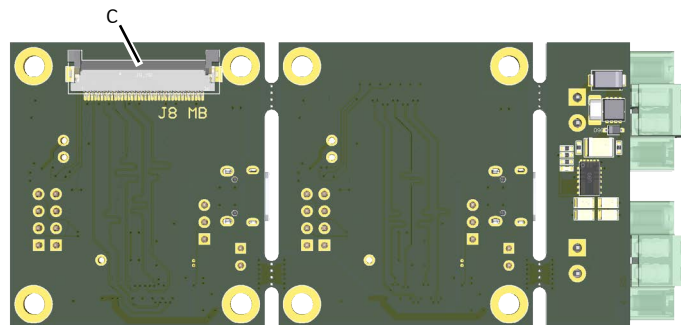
Carrier Board Connector on the bottom side of the adapter board
